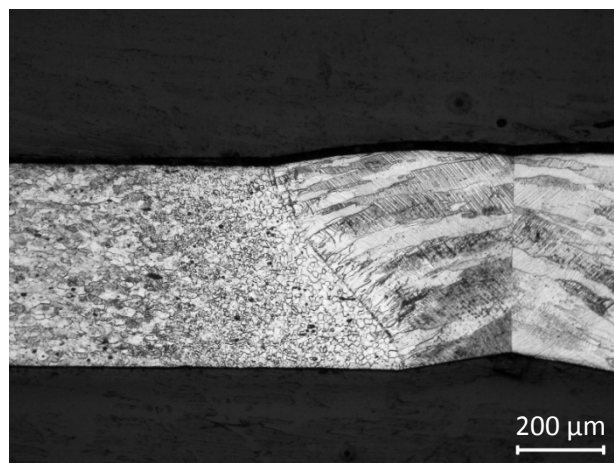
Macrograph of O-O 0.5 mm thick similar joint showing the welded zones
